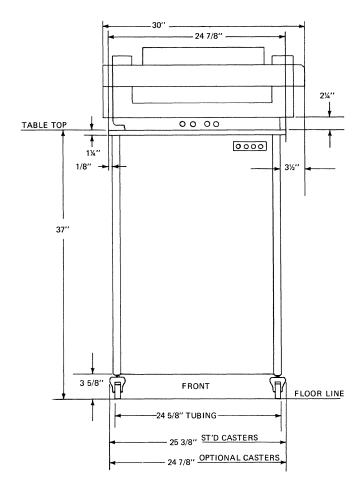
Dimensions, Front View, Series TC 700 and L 3000 Window Accounting Computer
